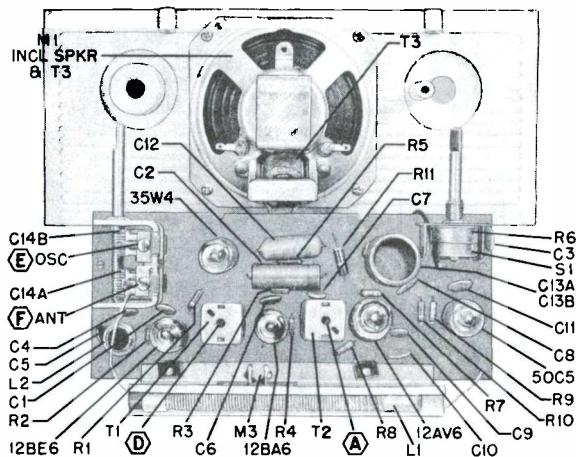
Top View of 5B4 Chassis Showing Location of Components and Alignment Points.
